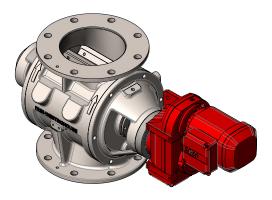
Direct drive (with parallel shaft SEW FAZ motor)
